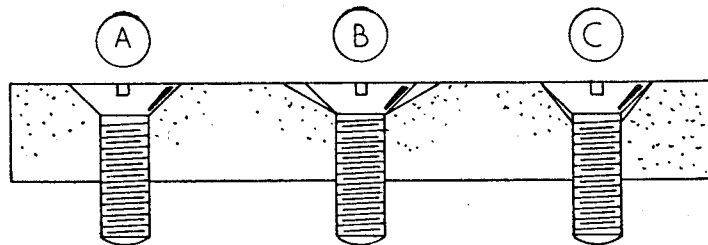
"A"—a well-fitting countersink ; "B"—the countersink angle too wide ; "C"—the screw-head bears on the mouth of the hole
